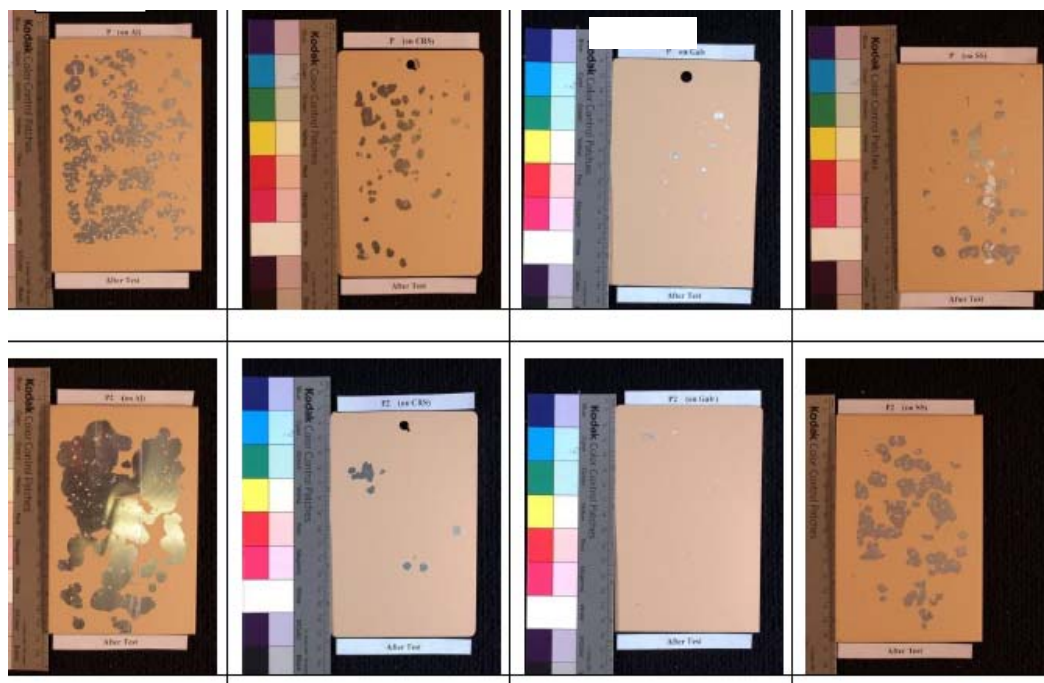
Picklex on (from left to right) Al, CRS, galvanized, and stainless steel (53030 top, 53022 bottom)
